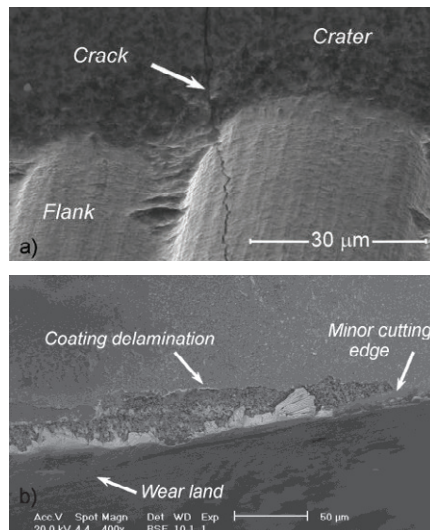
(a) Thermal cracking on PCBN tools; (b) coating delamination on the minor cutting edge
